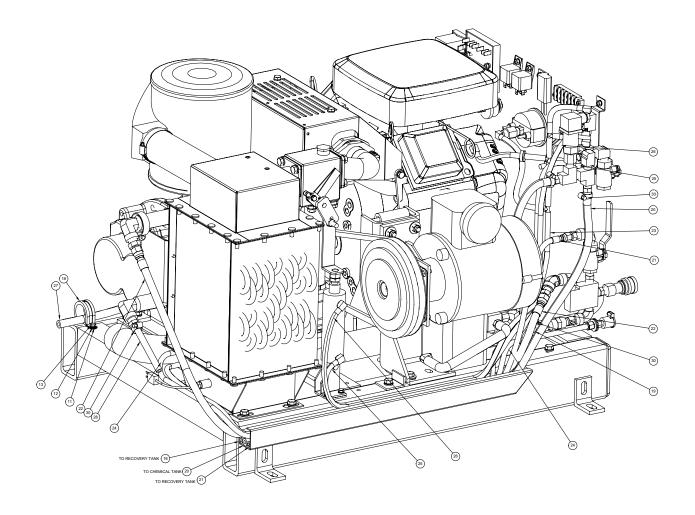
Frame Assembly - Rear View D-6151 Rev -
